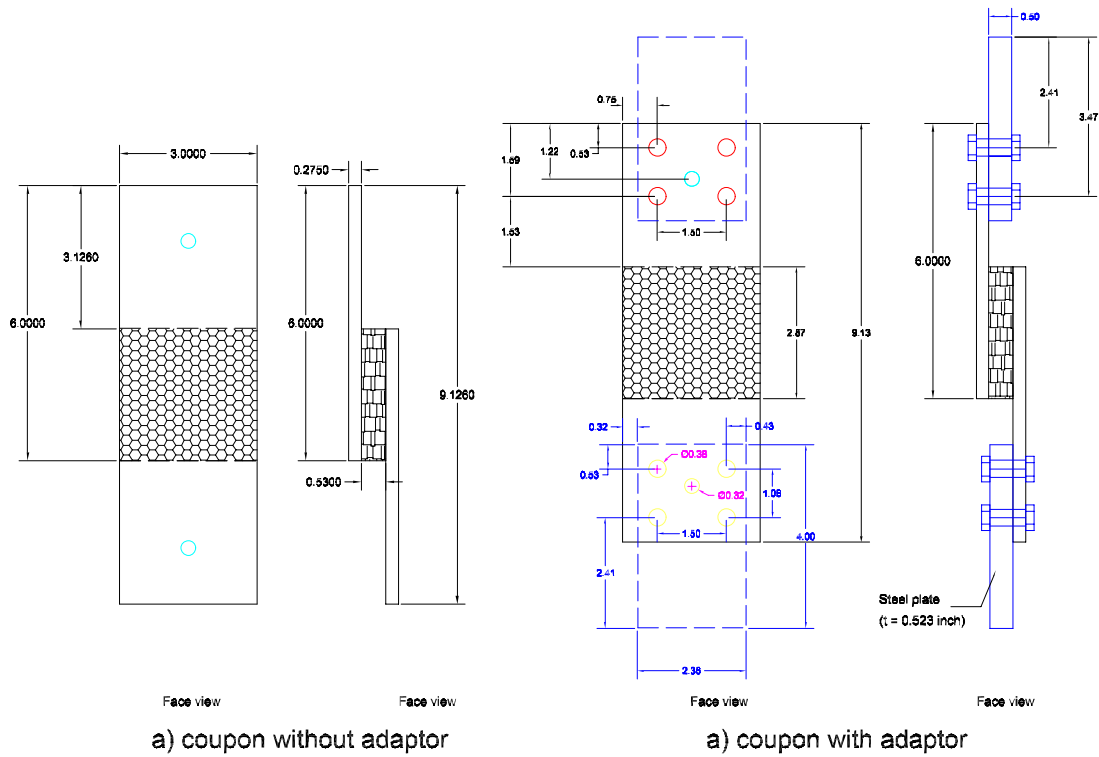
The Dimension of Polymer Honeycomb Test Coupon (unit = inch)
